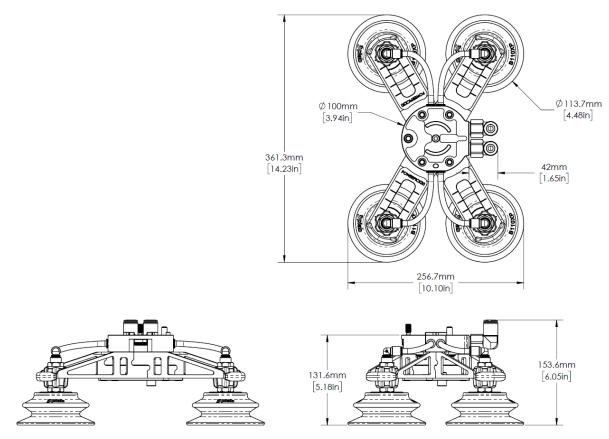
Technical Dimensions of PowerPick30 Gripper (Default Configuration)
